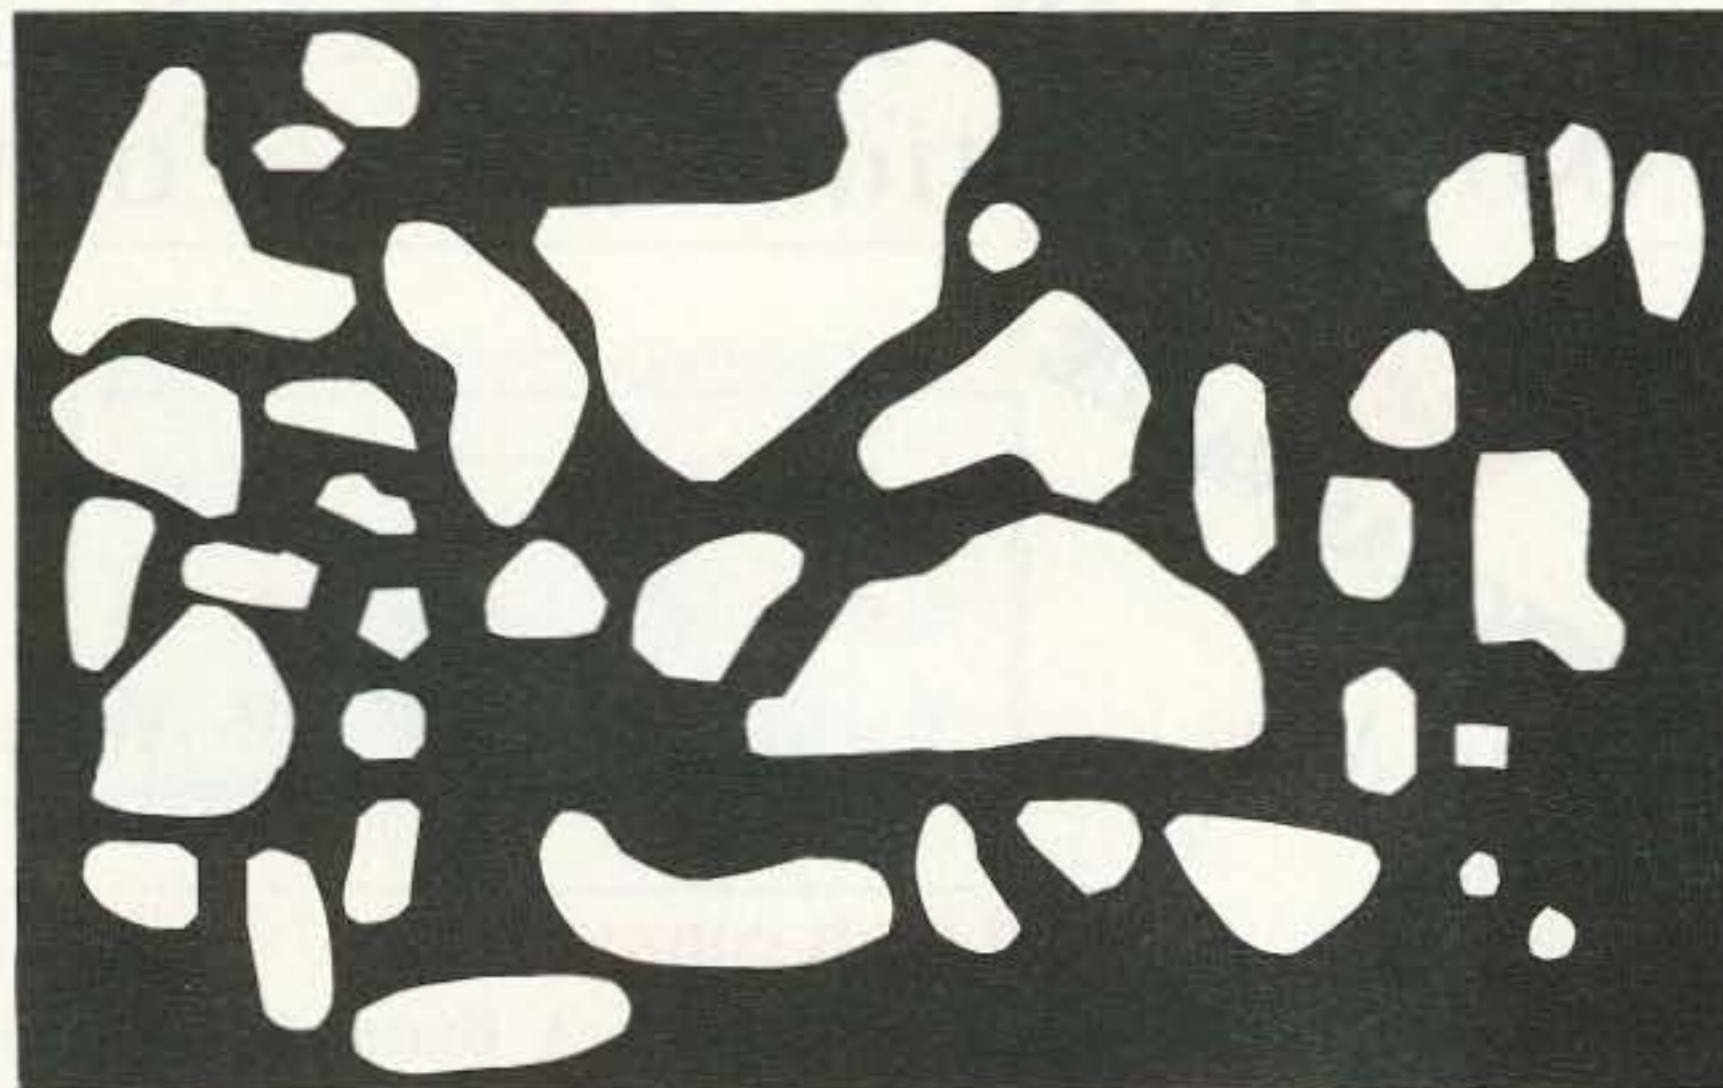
PC board foil pattern (component side shield layer). Solder leads on both side of the PC board where necessary.
